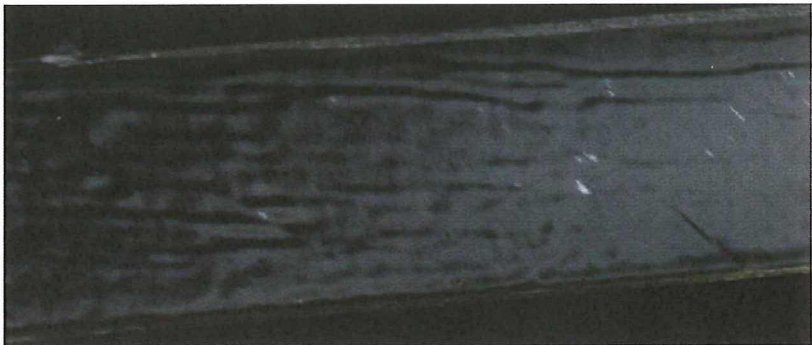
Slipped stringer plies in stringer 2 and 3
